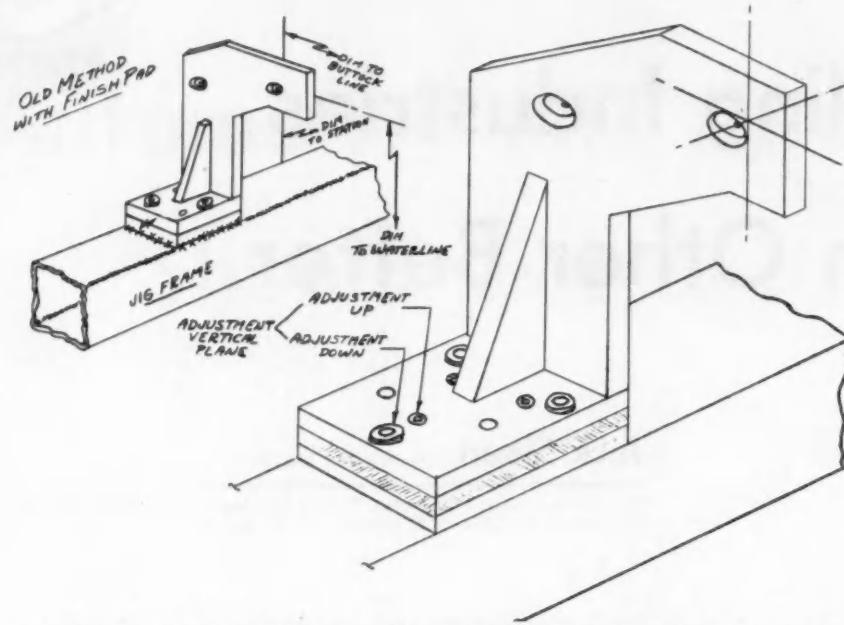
Typical mounting of jig detail. Upper left—original method for setting details for automotive body fixtures uses vernier height gages and scribes; lower right—simpler and cheaper method developed by aircraft industry merely uses four leveling screws
